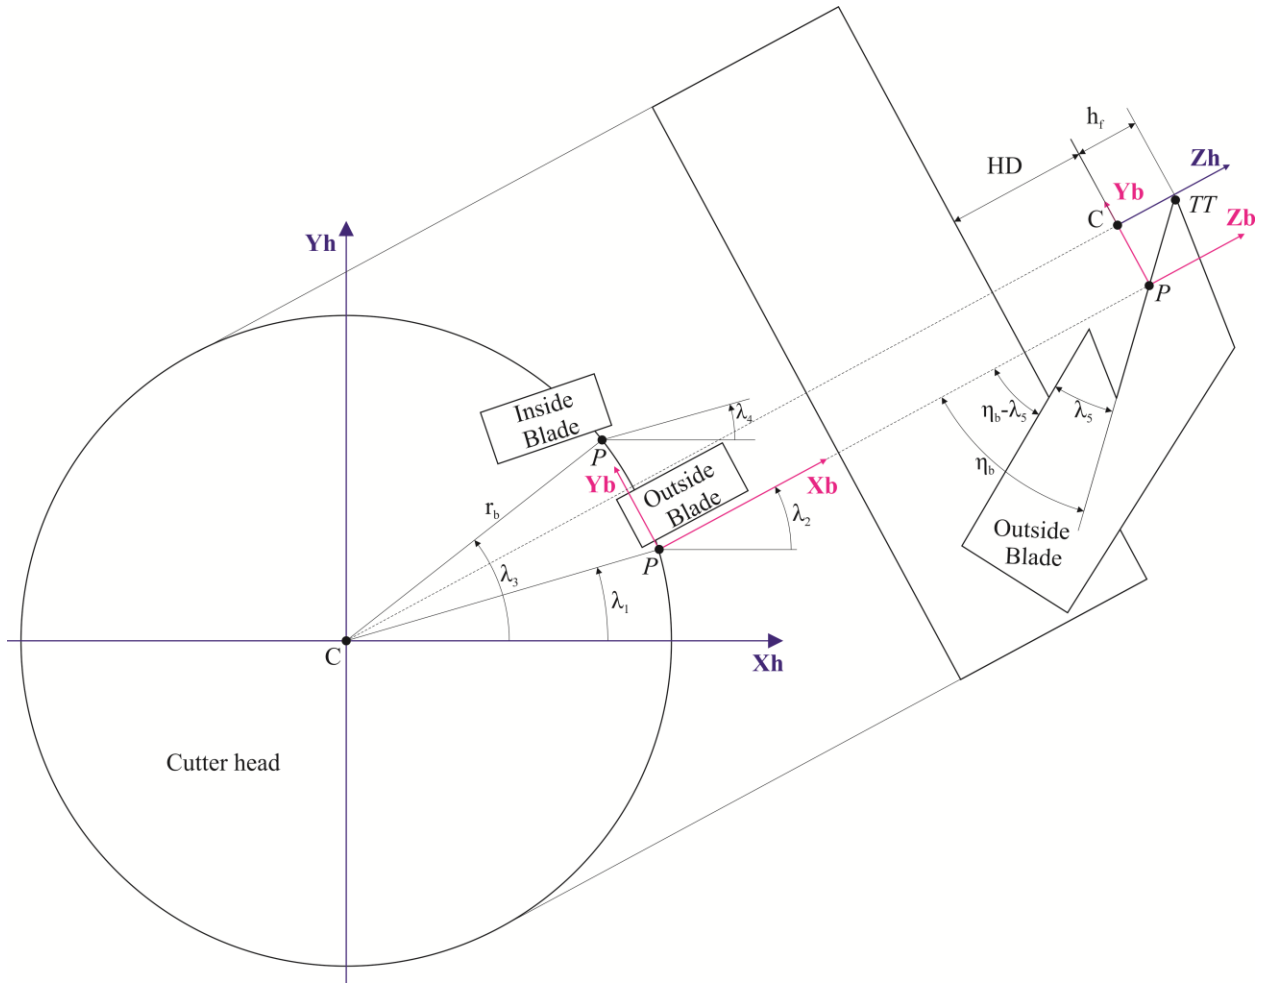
The schematic view of the cutter head and the blade orientation.
